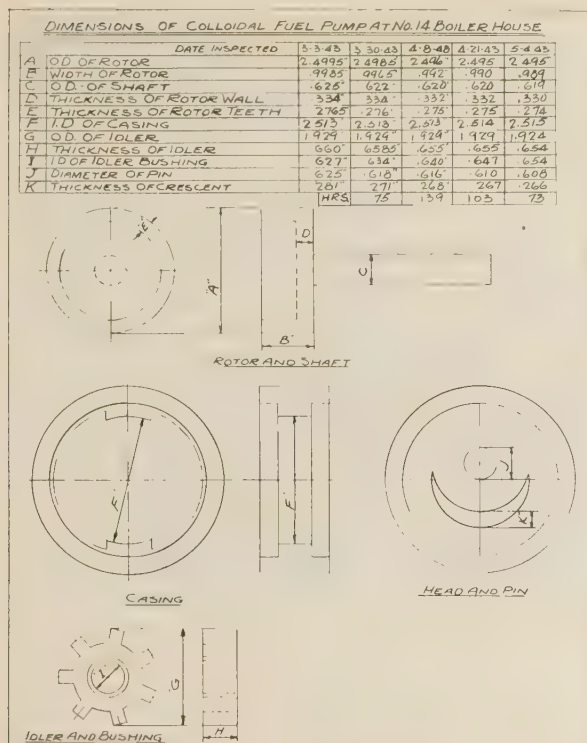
TABLE AND SKETCH SHOWING WEAR ON ROTARY PUMP FROM PUMPING COAL-IN-OIL FUEL
